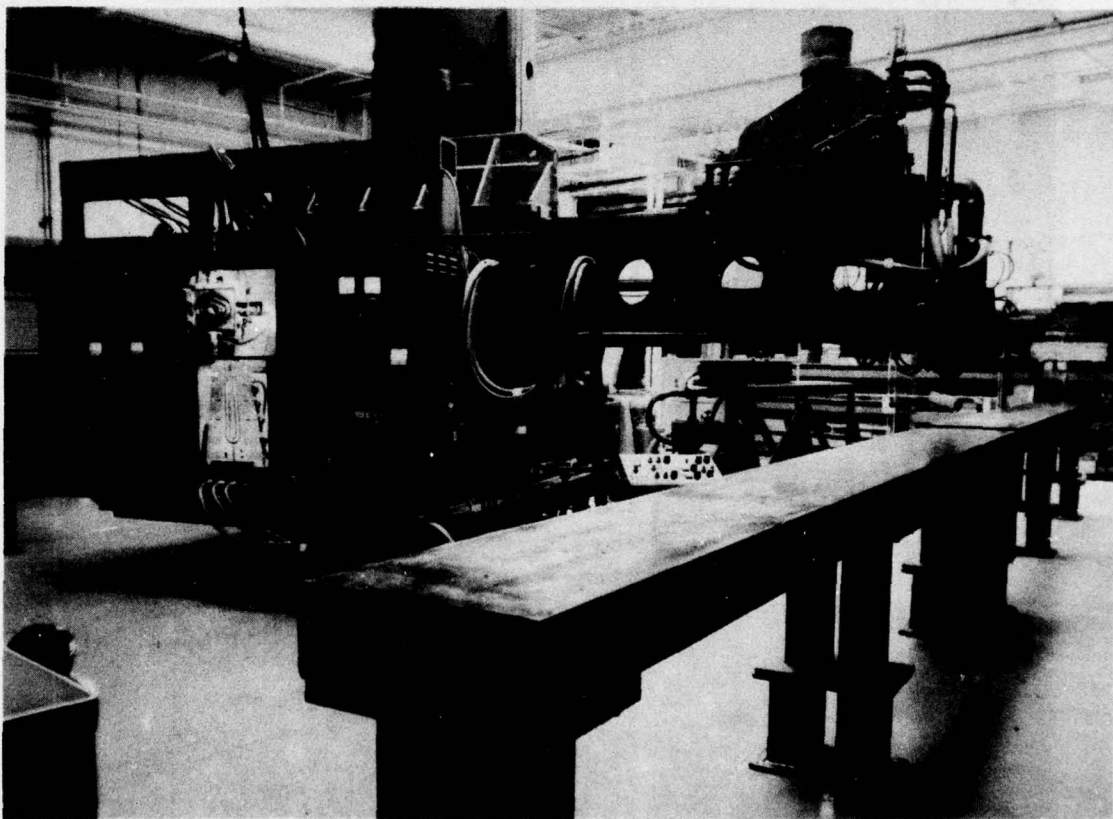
ICF Support Tables for Flat Plate Welding Fixture
